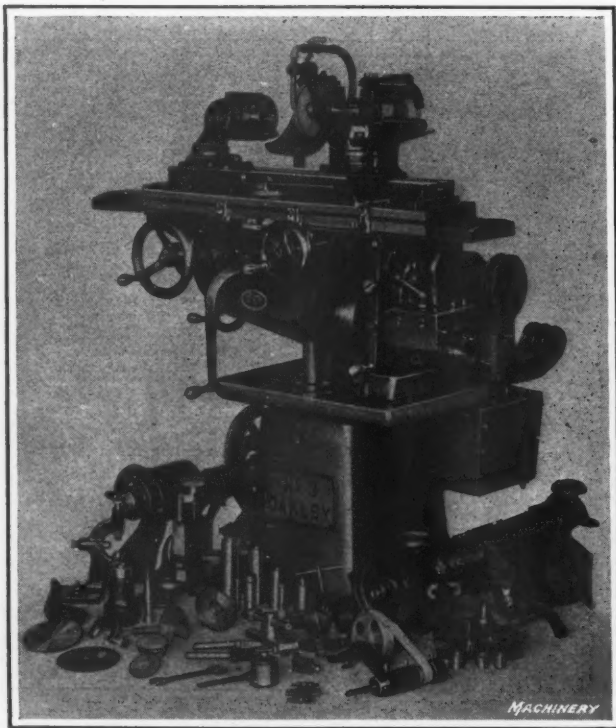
Oakley No. 3 Universal Tool-room Grinder
